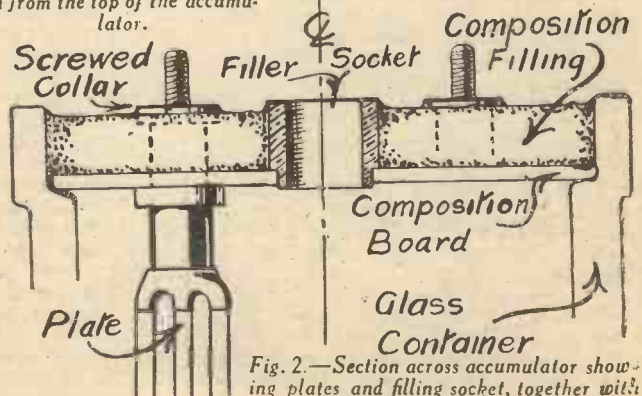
Section across accumulator showing plates and filling socket, together with composition board in position.
